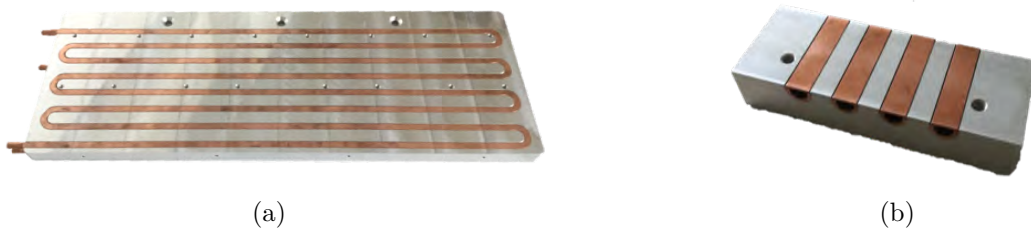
(a) First prototype of the FEE cooling with press-fitted tube channels by Cool Tec Electronic GmbH. (b) Cross-sectional view of the press-fitted tube channels.
